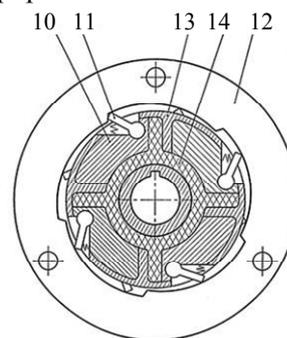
Structural scheme of blade turbine freewheel variance as an example of transmission implemented at the combined turbine drive assembly
